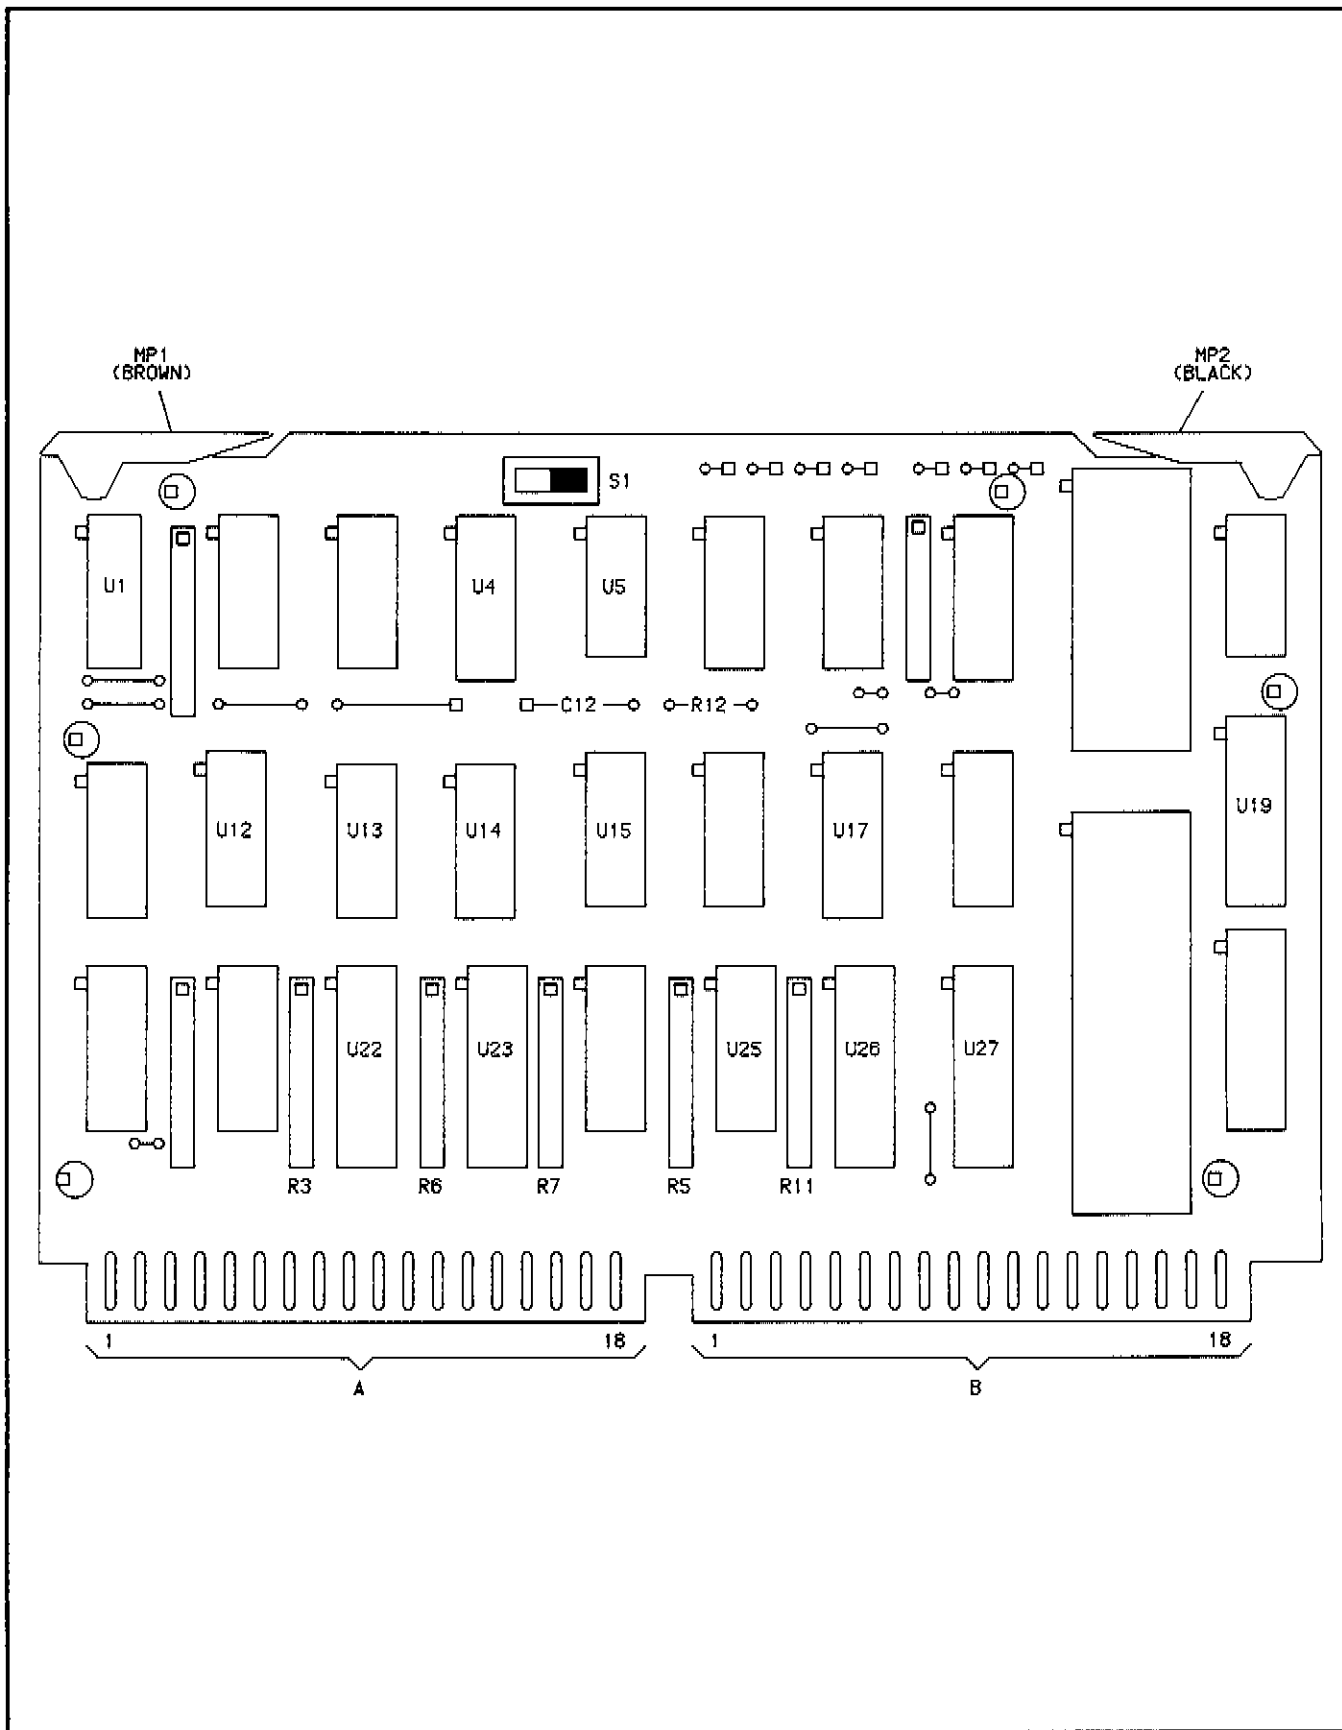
P/O A2A1 Keycode Assembly Component Locator
